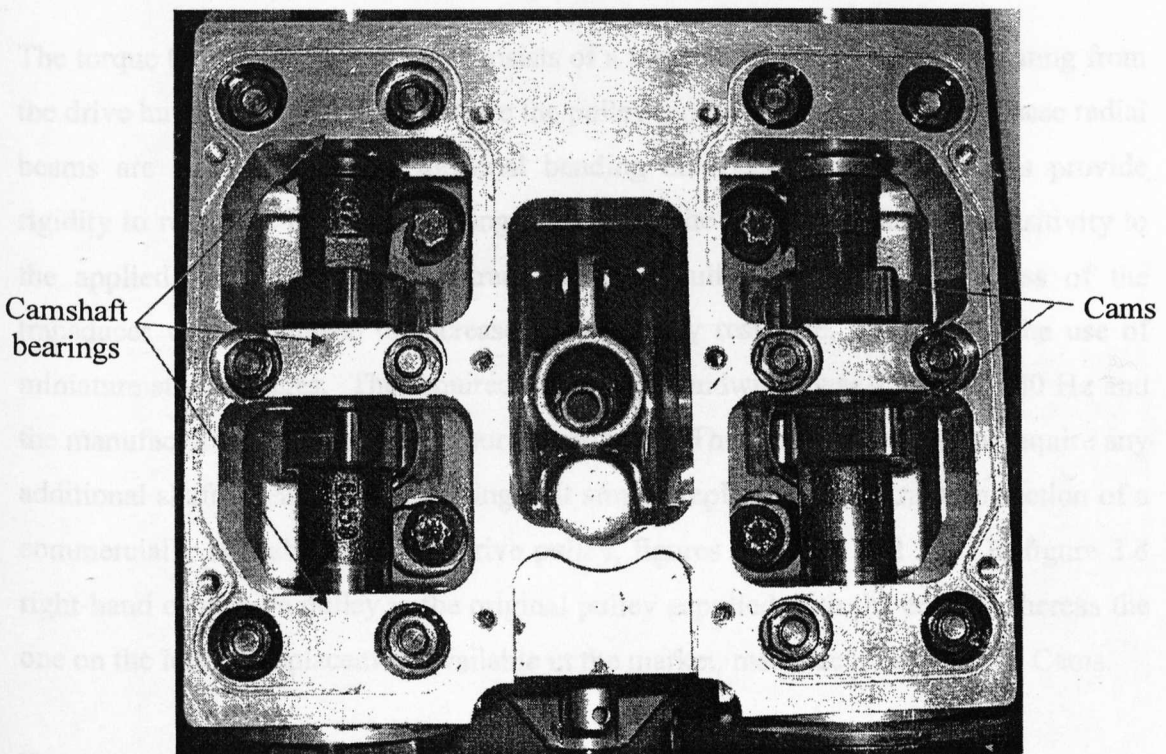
Ricardo Hydra single cylinder gasoline engine, cylinder head having two camshafts with cams in phase on each shaft.
